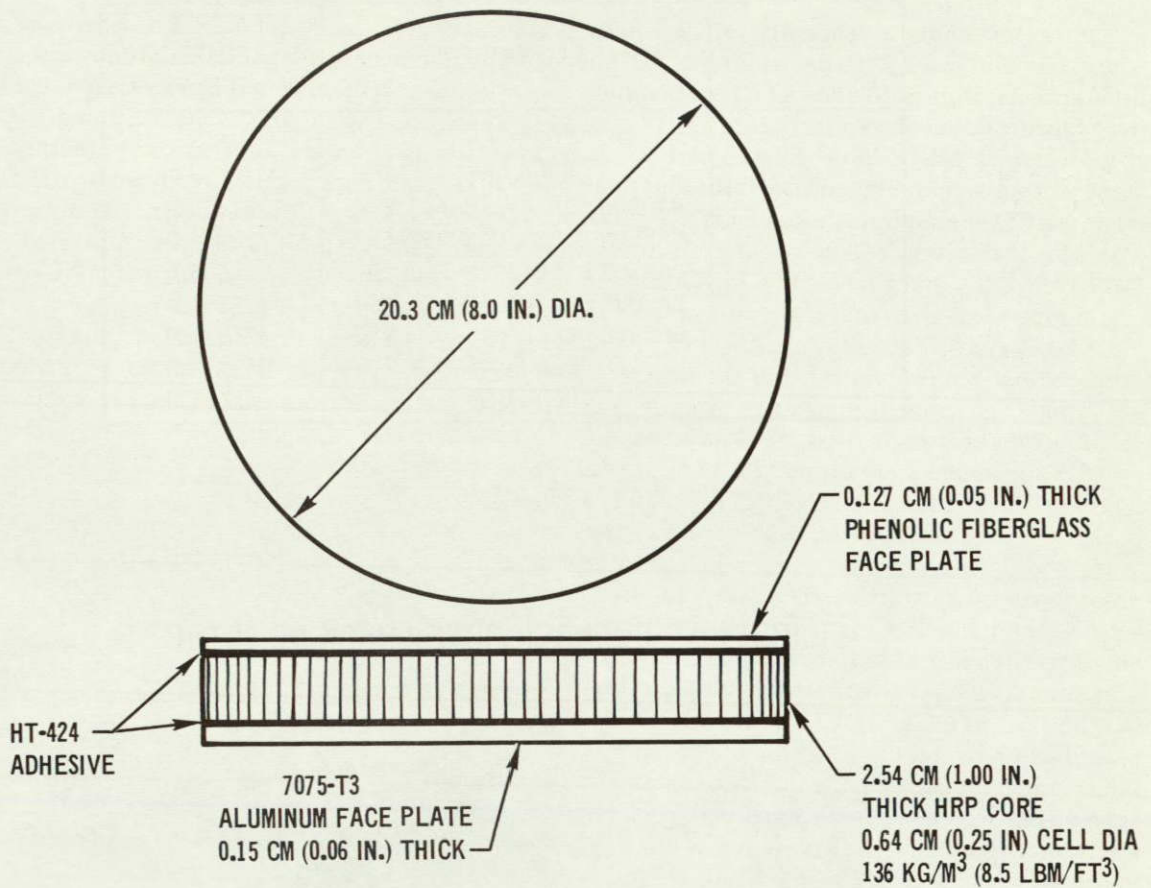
UNASSEMBLED TEST SPECIMEN
